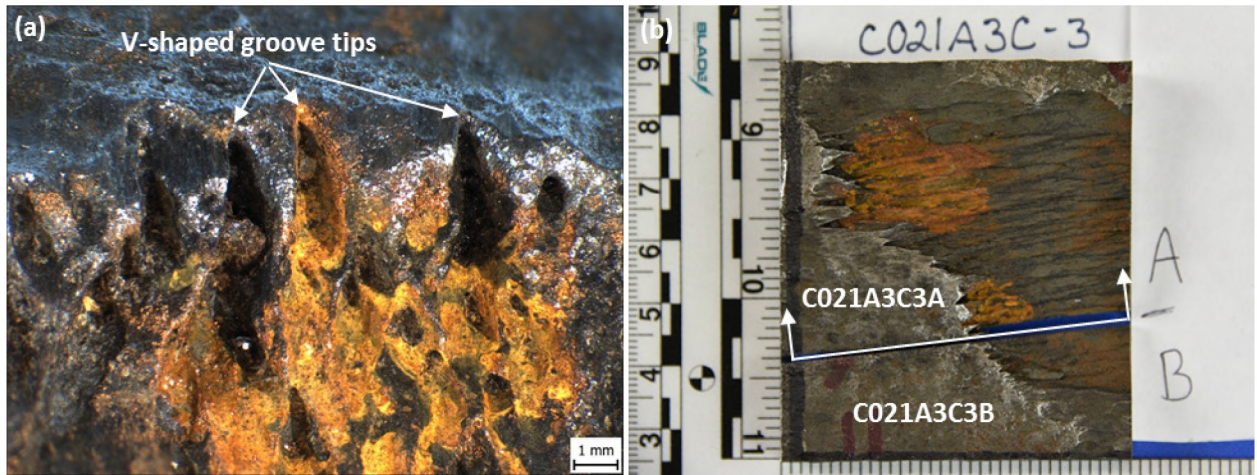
Specimen C021A3C3 (a) V-pointed Groove Tips and (b) Cross Section Location
